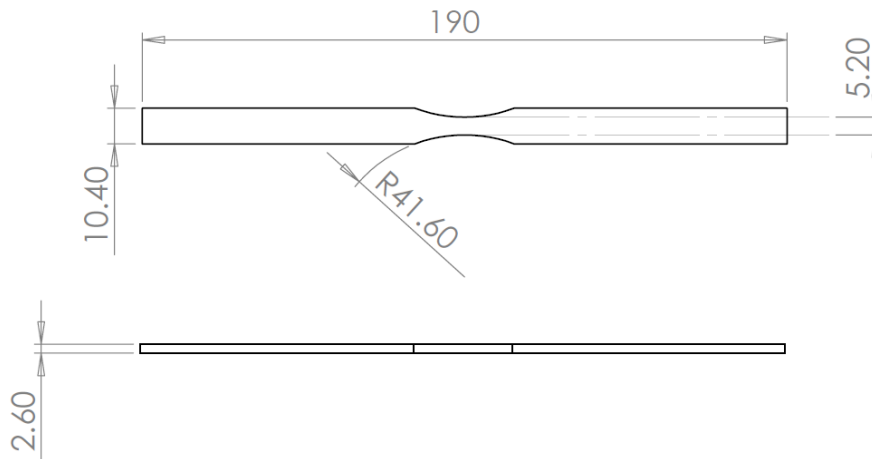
Dimensions, in mm, of the specimens used for fatigue testing
